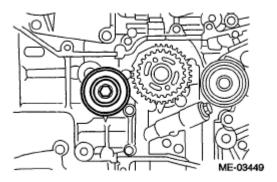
Identifying Belt Idler Courtesy of SUBARU OF AMERICA, INC.
